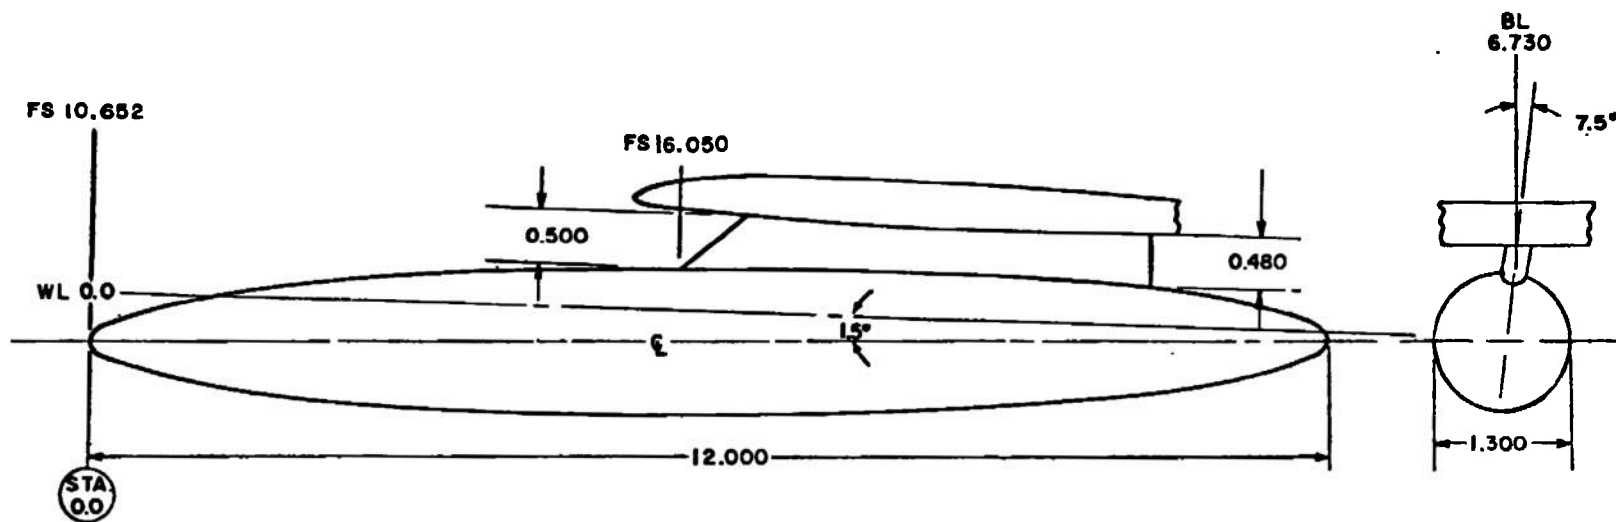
Details and Dimensions of the SUU-51 (LGDM) Model
